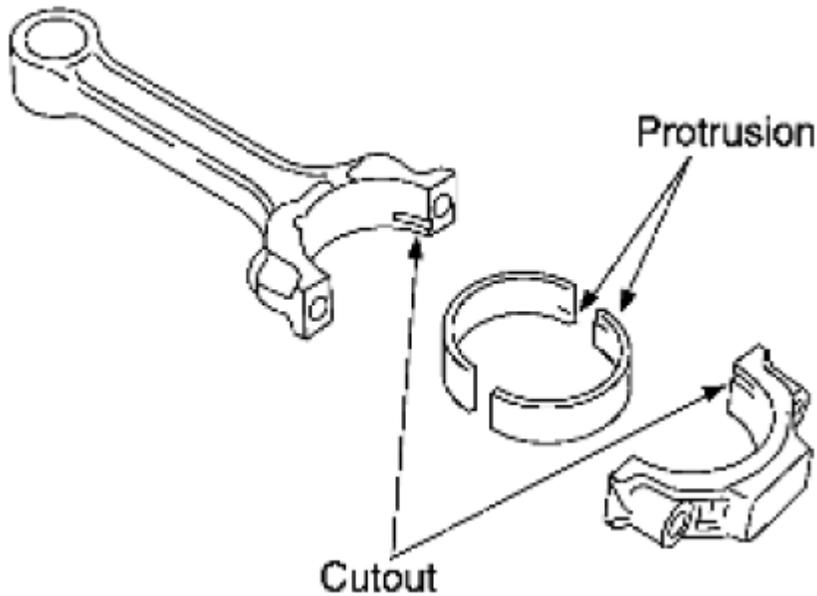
Identifying Cutout On Connecting Rod Bearing
